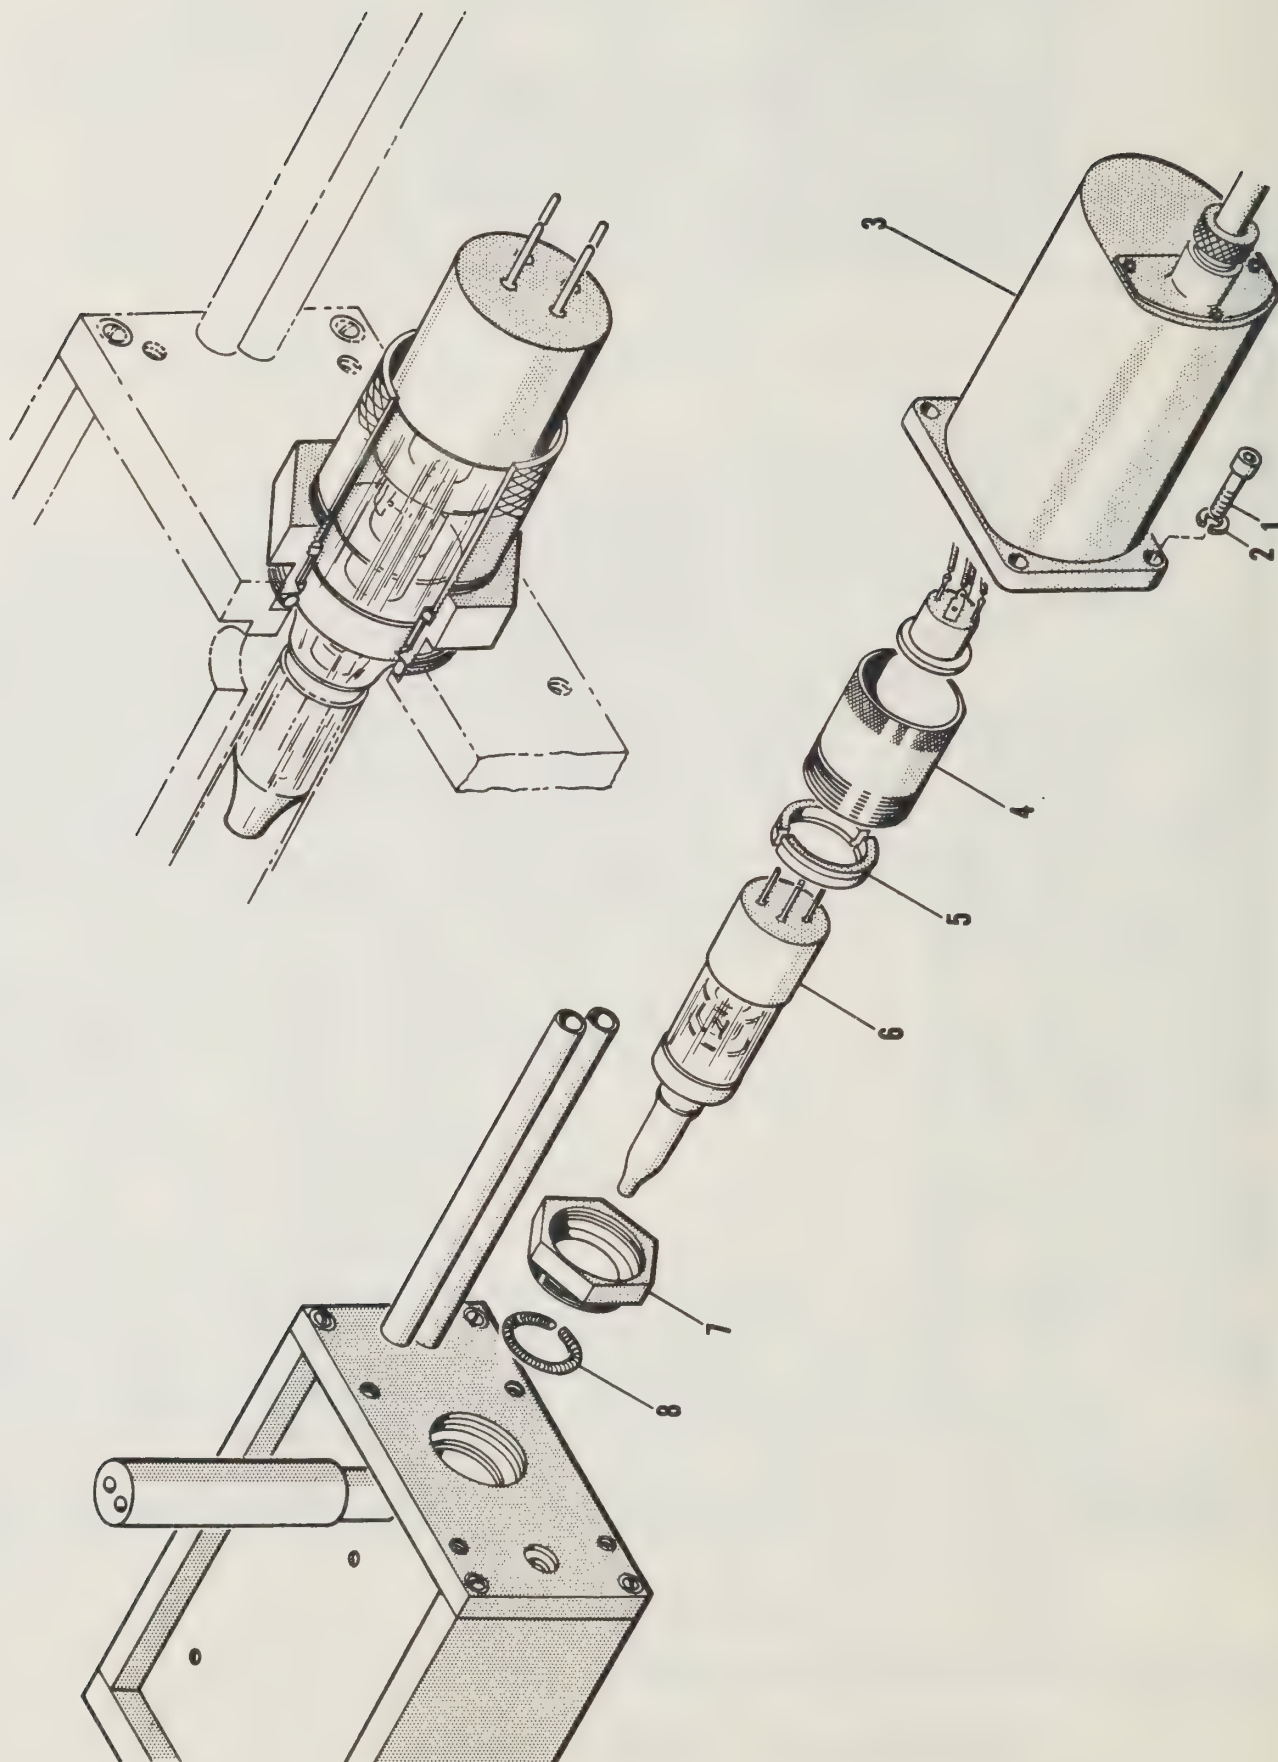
EXPLODED VIEW OF KLYSTRON MOUNTING PARTS
